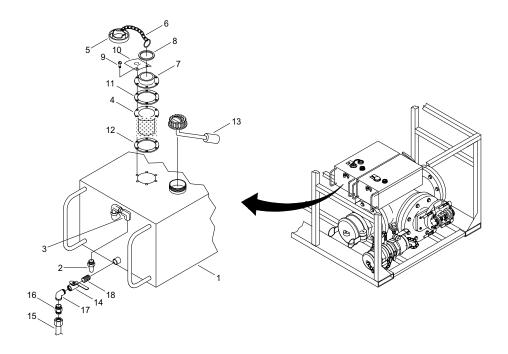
Fuel Additive Injector Assembly CI and SDA Additive Tank.
